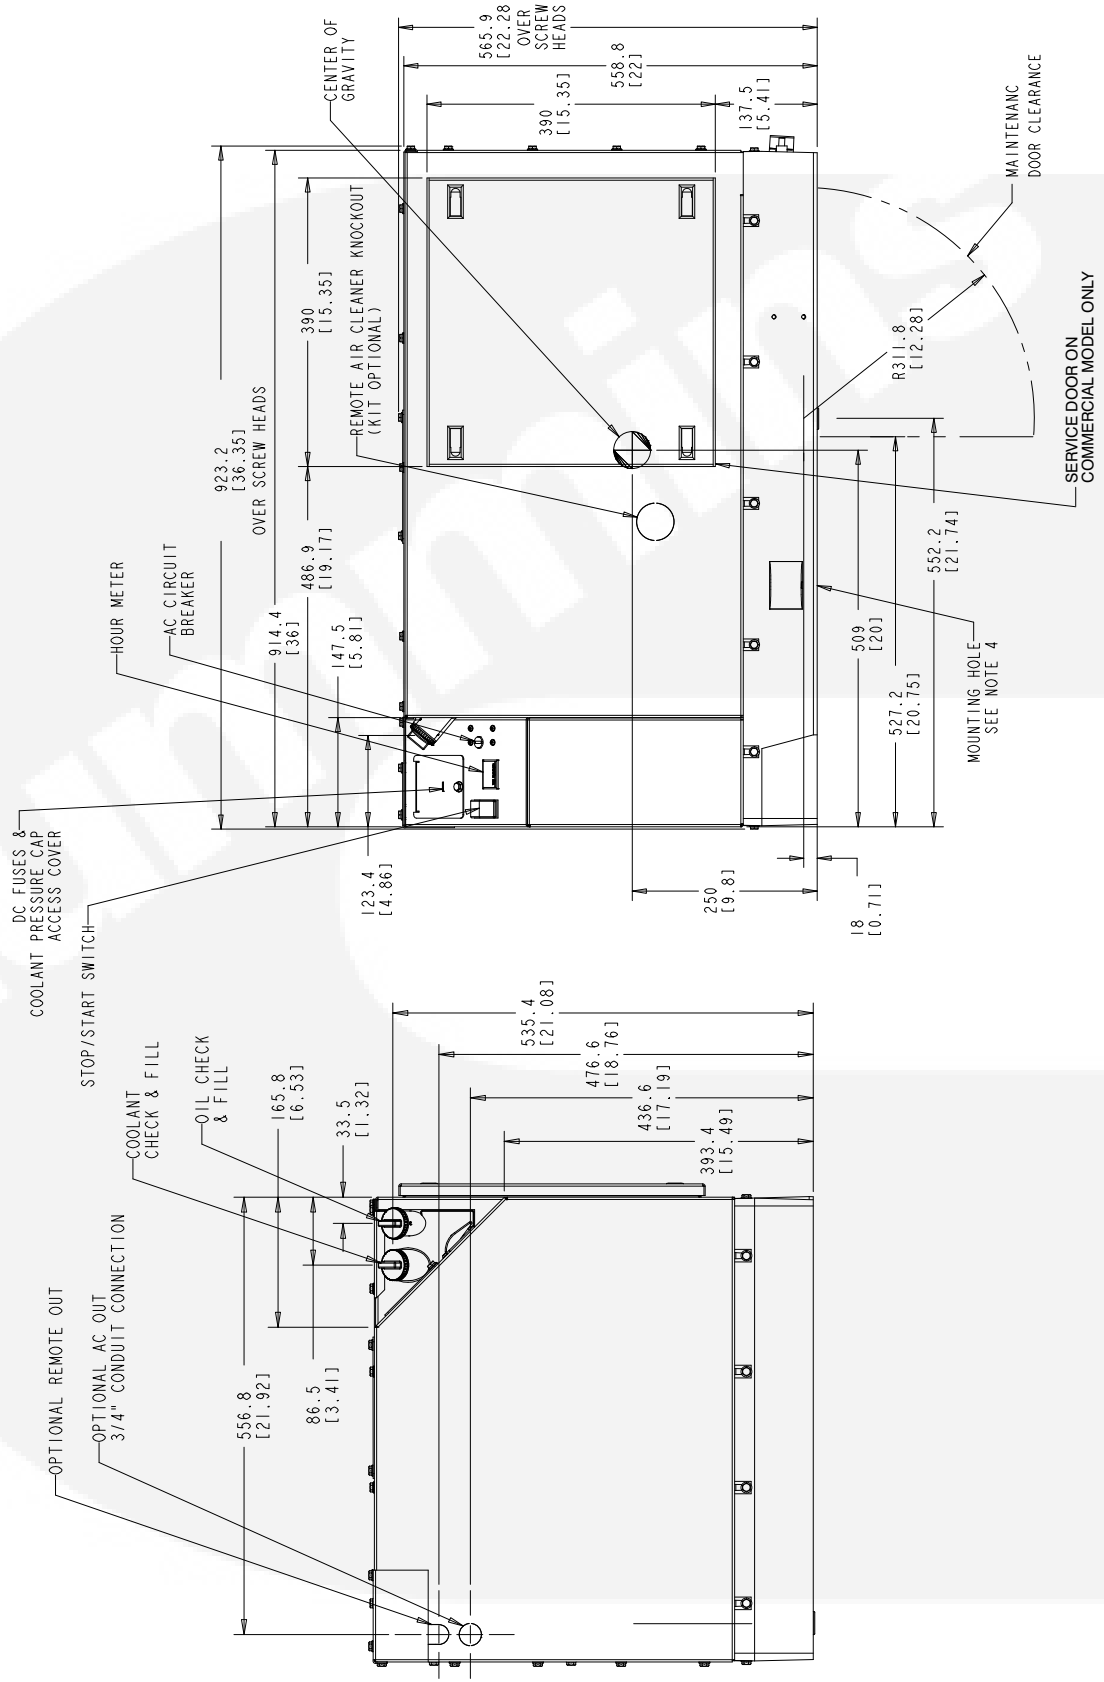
OUTLINE DRAWING— FRONT AND LEFT SIDES
